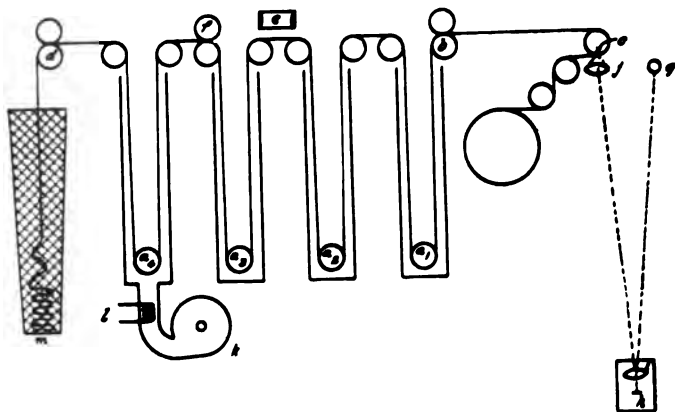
Showing Diagrammatically How Tape Is Fed Thru Machine
